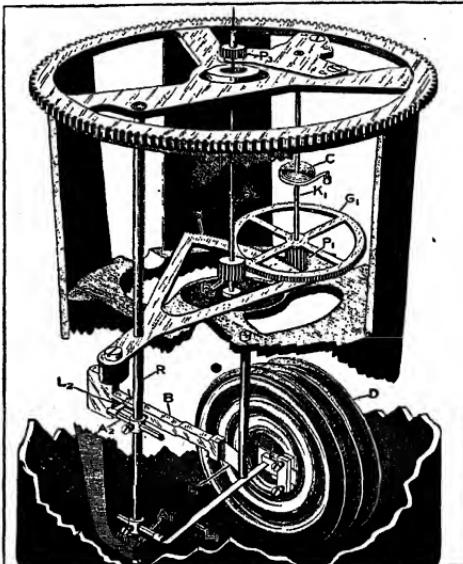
Diaphragm and lower gearing of Kollsman sensitive altimeter.
